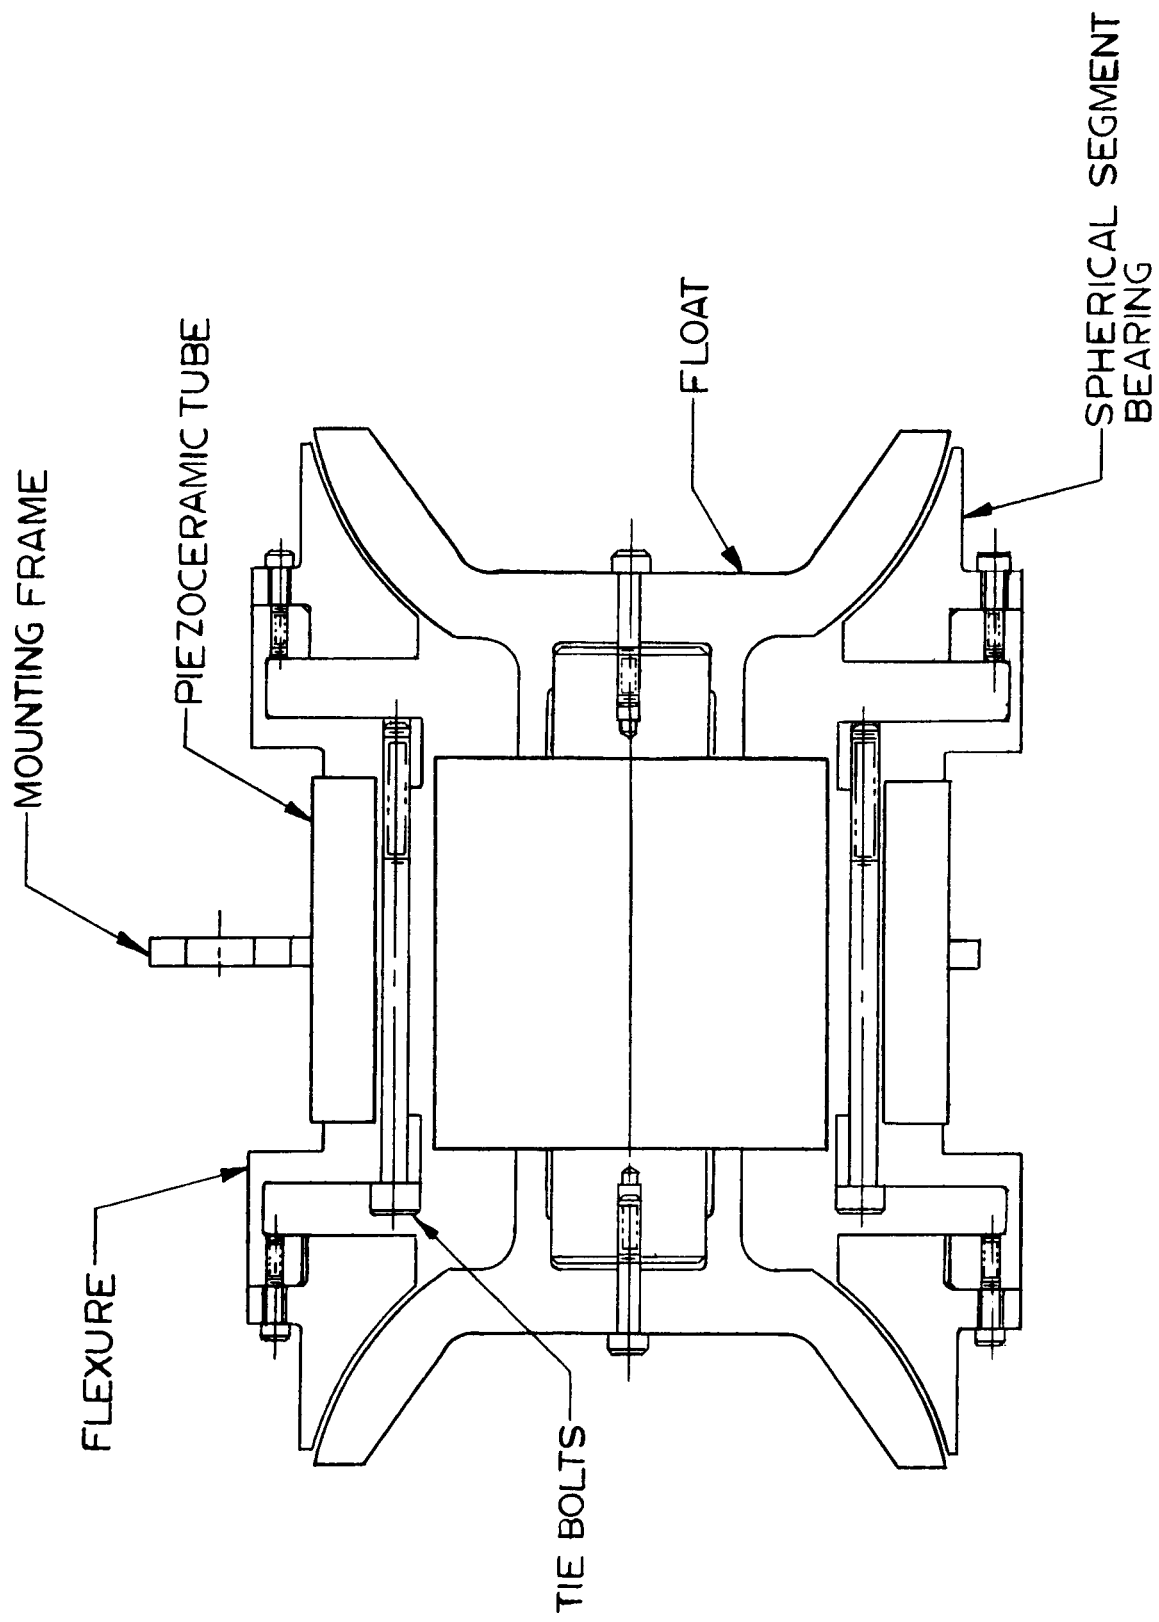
Cross Sectional View of Modified Spherical-Bearing,
